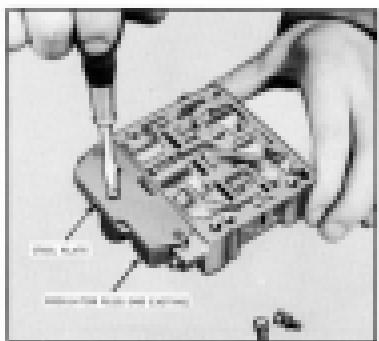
Removing Steel Plate from Regulator Plug Body Casting.
